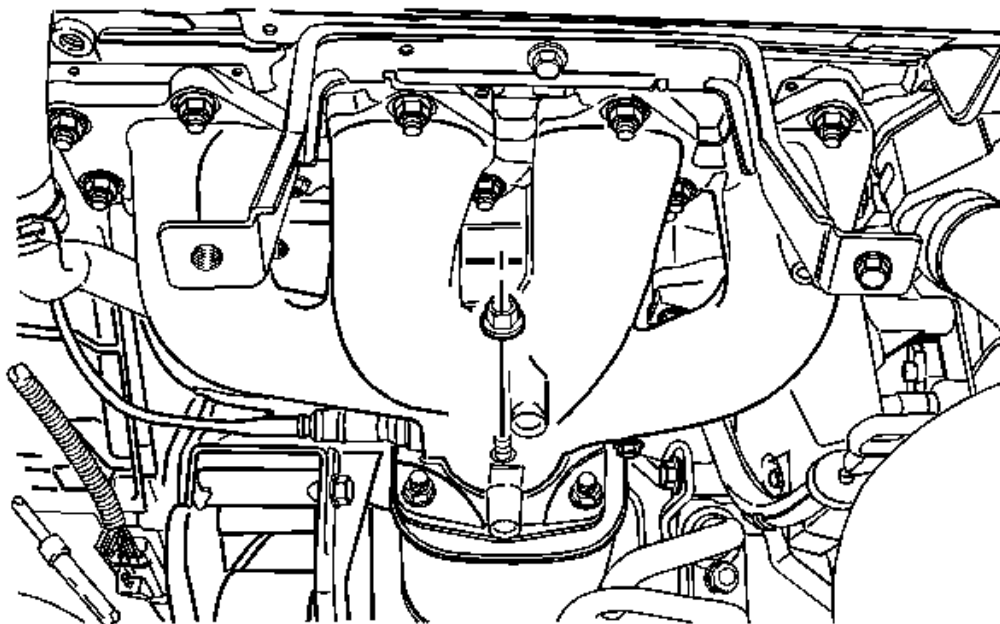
View Of Auxiliary Catalytic Converter Upper Flange Nuts
